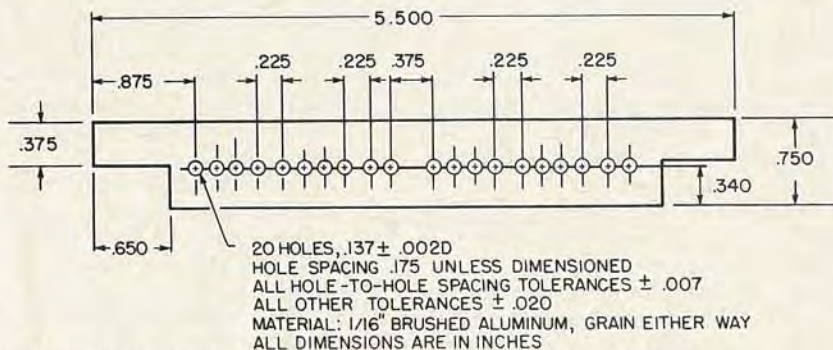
THE FRONT PANEL is formed from a sheet of 1/16-inch brushed aluminum.
